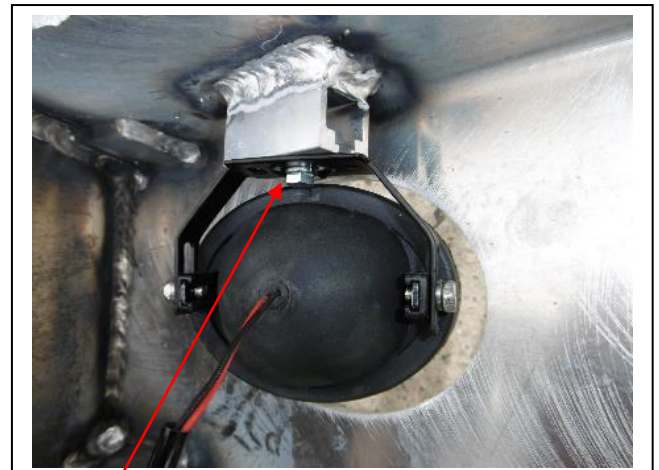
Cut across grille to fit over steel mount leaving grille mount on grille.
